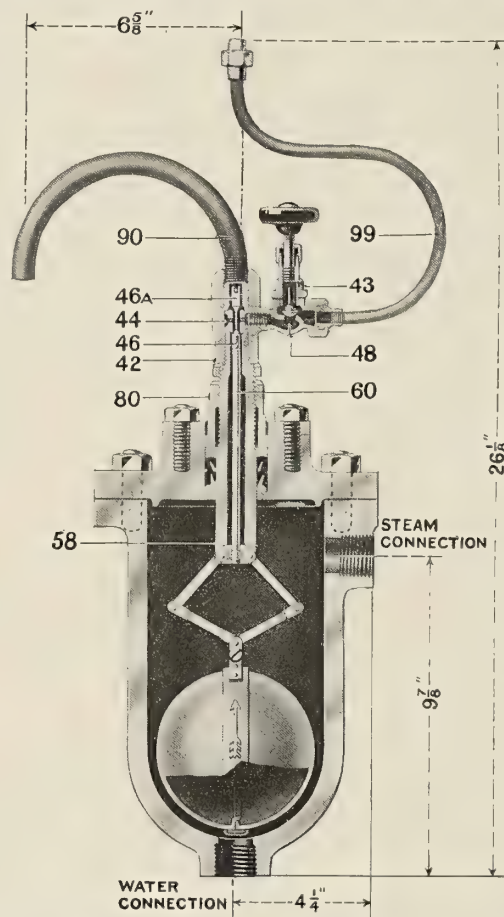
Sectional View of the Todd Thermofeed Regulator
